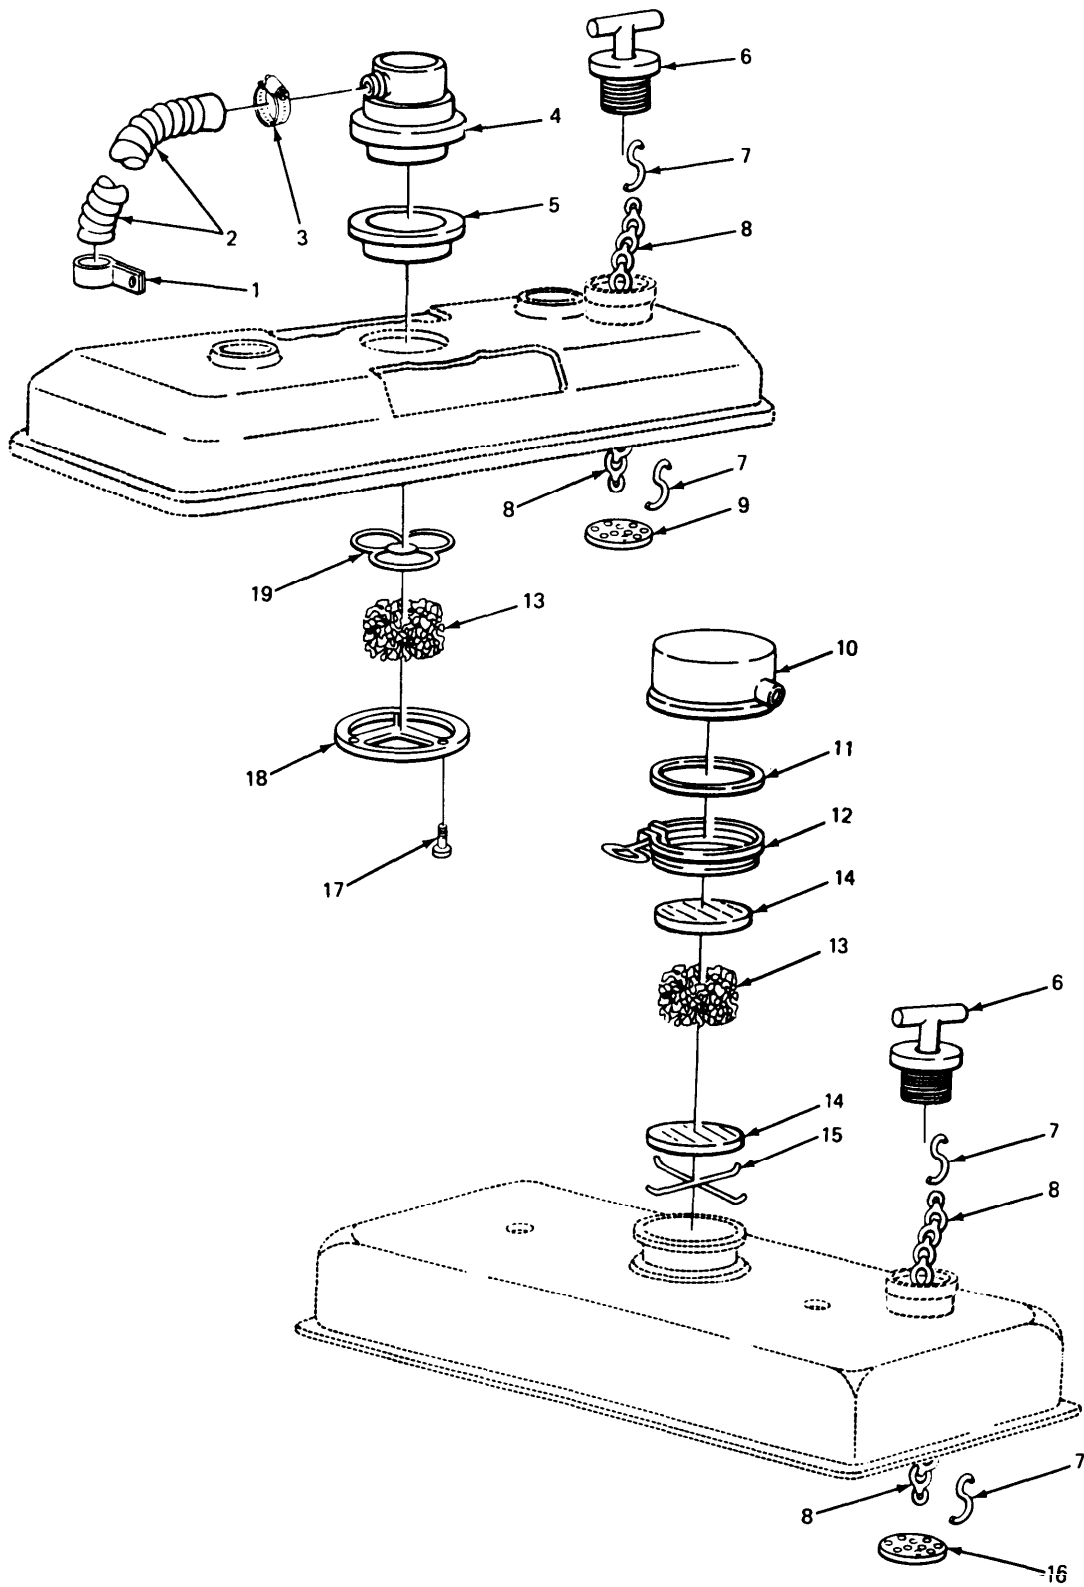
COVERS AND RELATED PARTS FOR THE EARLY T ENGINE
